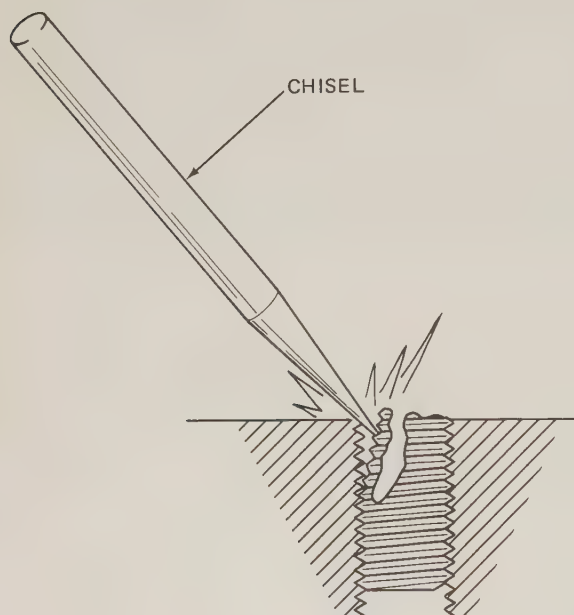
Remove the drilled shell of a broken screw by collapsing it with a chisel. (Ford Motor Company)
